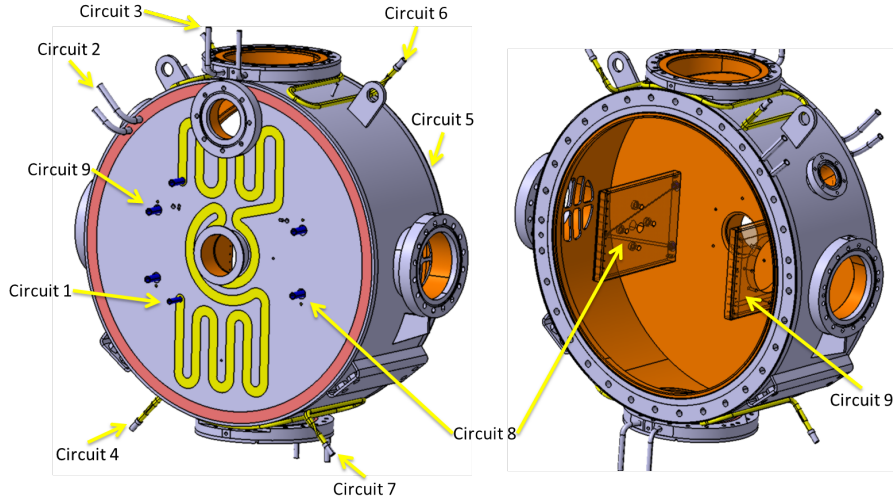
Cooling circuits of the cavity tank and zoom on the stem flange .
